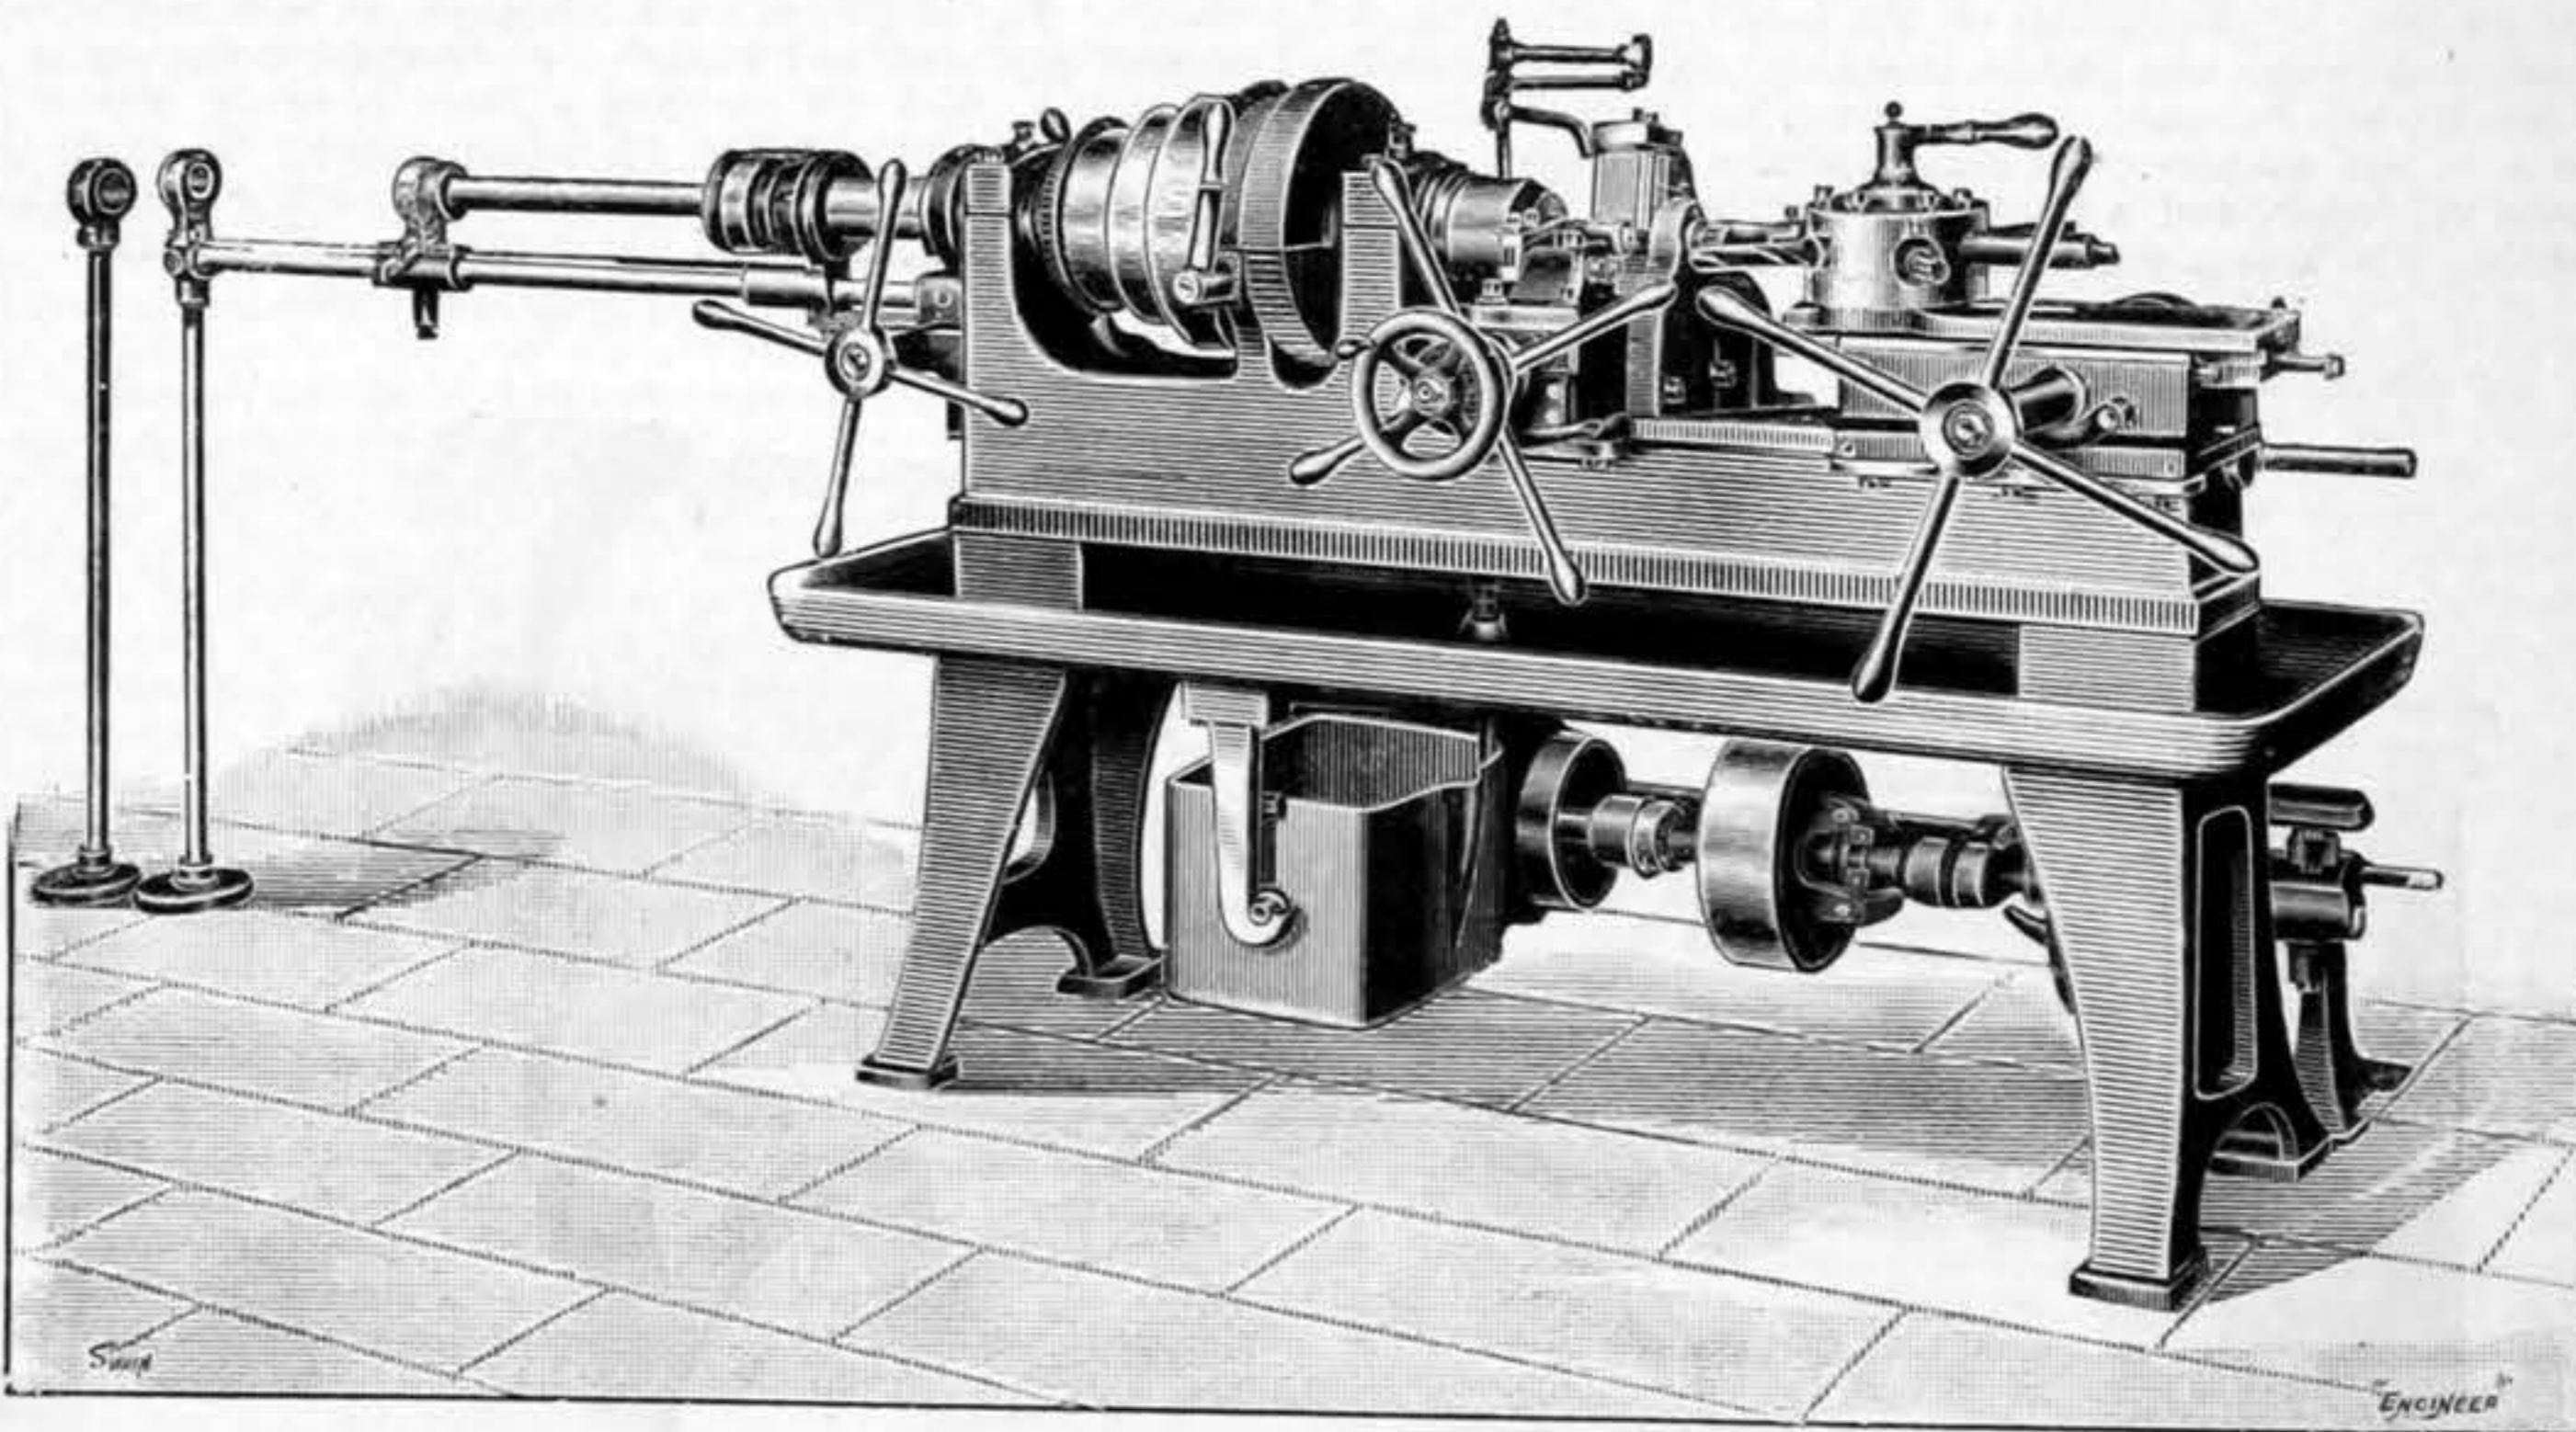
MESSRS. C. CHURCHILL AND CO.—FIRST OPERATION HUB MACHINE
